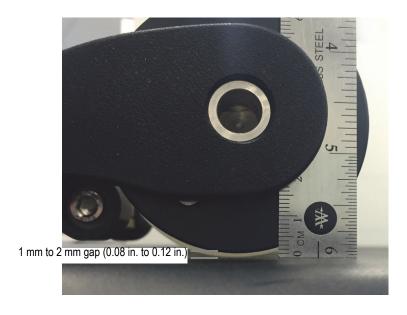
Acoustic wheel flange and surface gap (RollerFORM XL)
